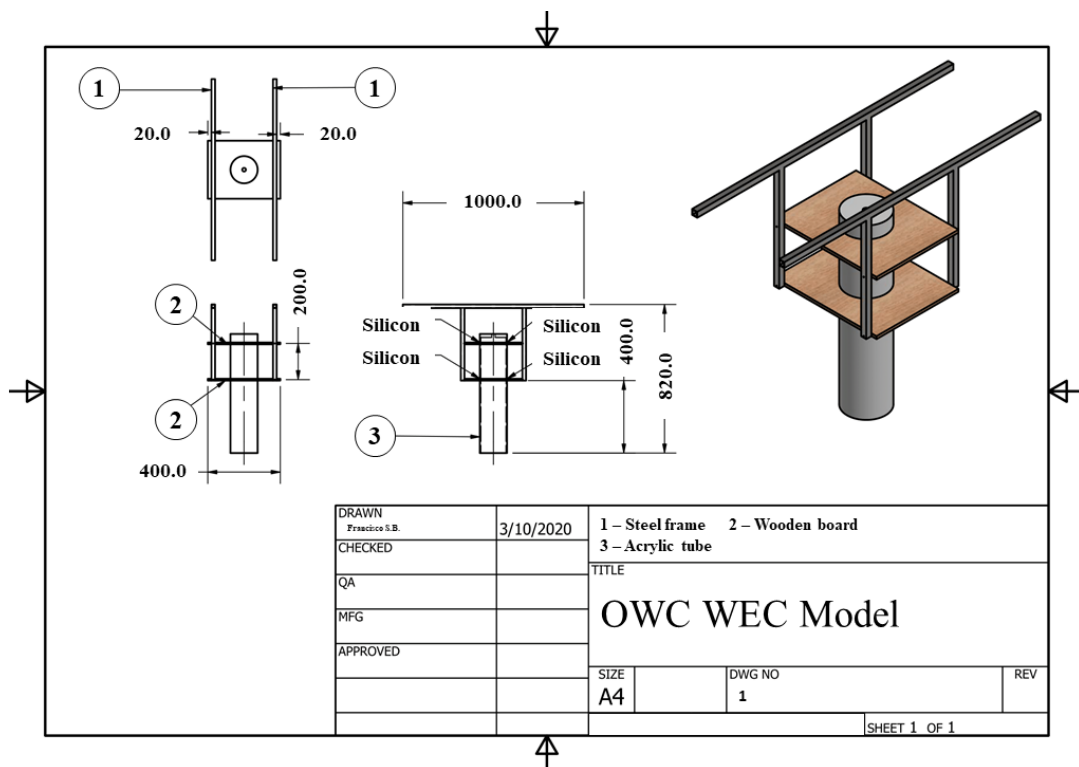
OWC WEC model preliminary technical drawing (measurements in millimeters).
